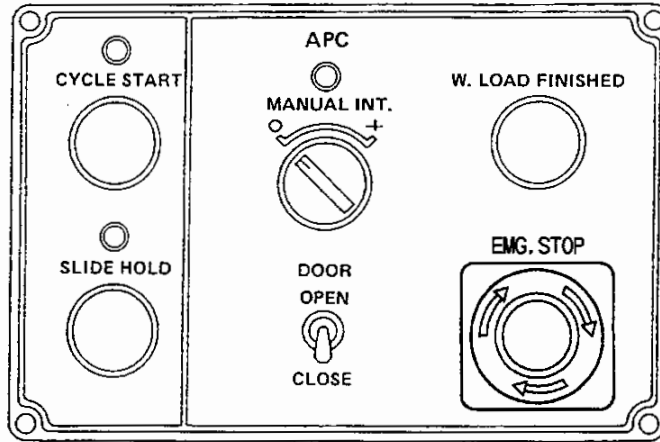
Parallel Type 2-Pallet APC Operation Panel (Vertical Machining Centers)
